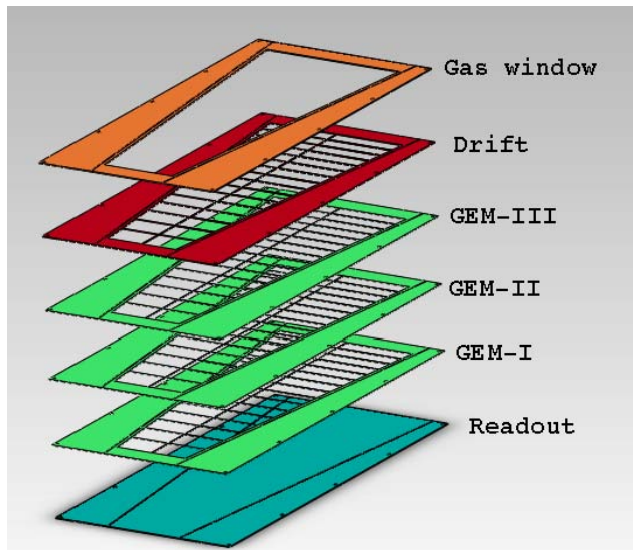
The frame assembly for a GEM module prototype of the size proposed for the largest SoLID GEMs
